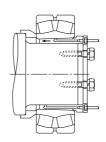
Mounting with Special Sleeve and Hydraulic Pressure
